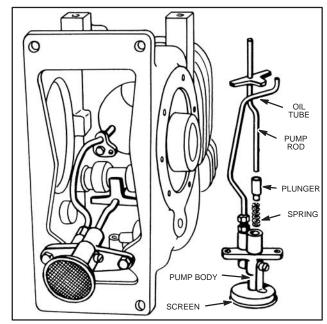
MODELS A, B OLD STYLE OIL PUMP
